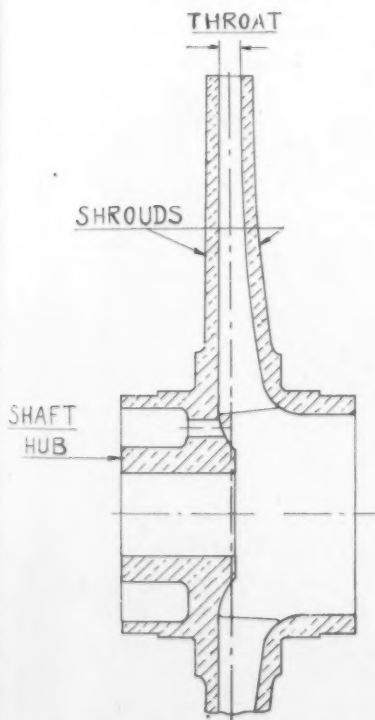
SECTION OF LARGE IMPELLER SHOWN IN FIG. 20. METAL POURED WITH THE AXIS HORIZONTAL THROUGH RISER ATTACHED TO THE HUB, POURED RAPIDLY AND FREELY VENTED WITH RECTANGULAR VENTS AT THE TOP OF BOTH SHROUDS.
